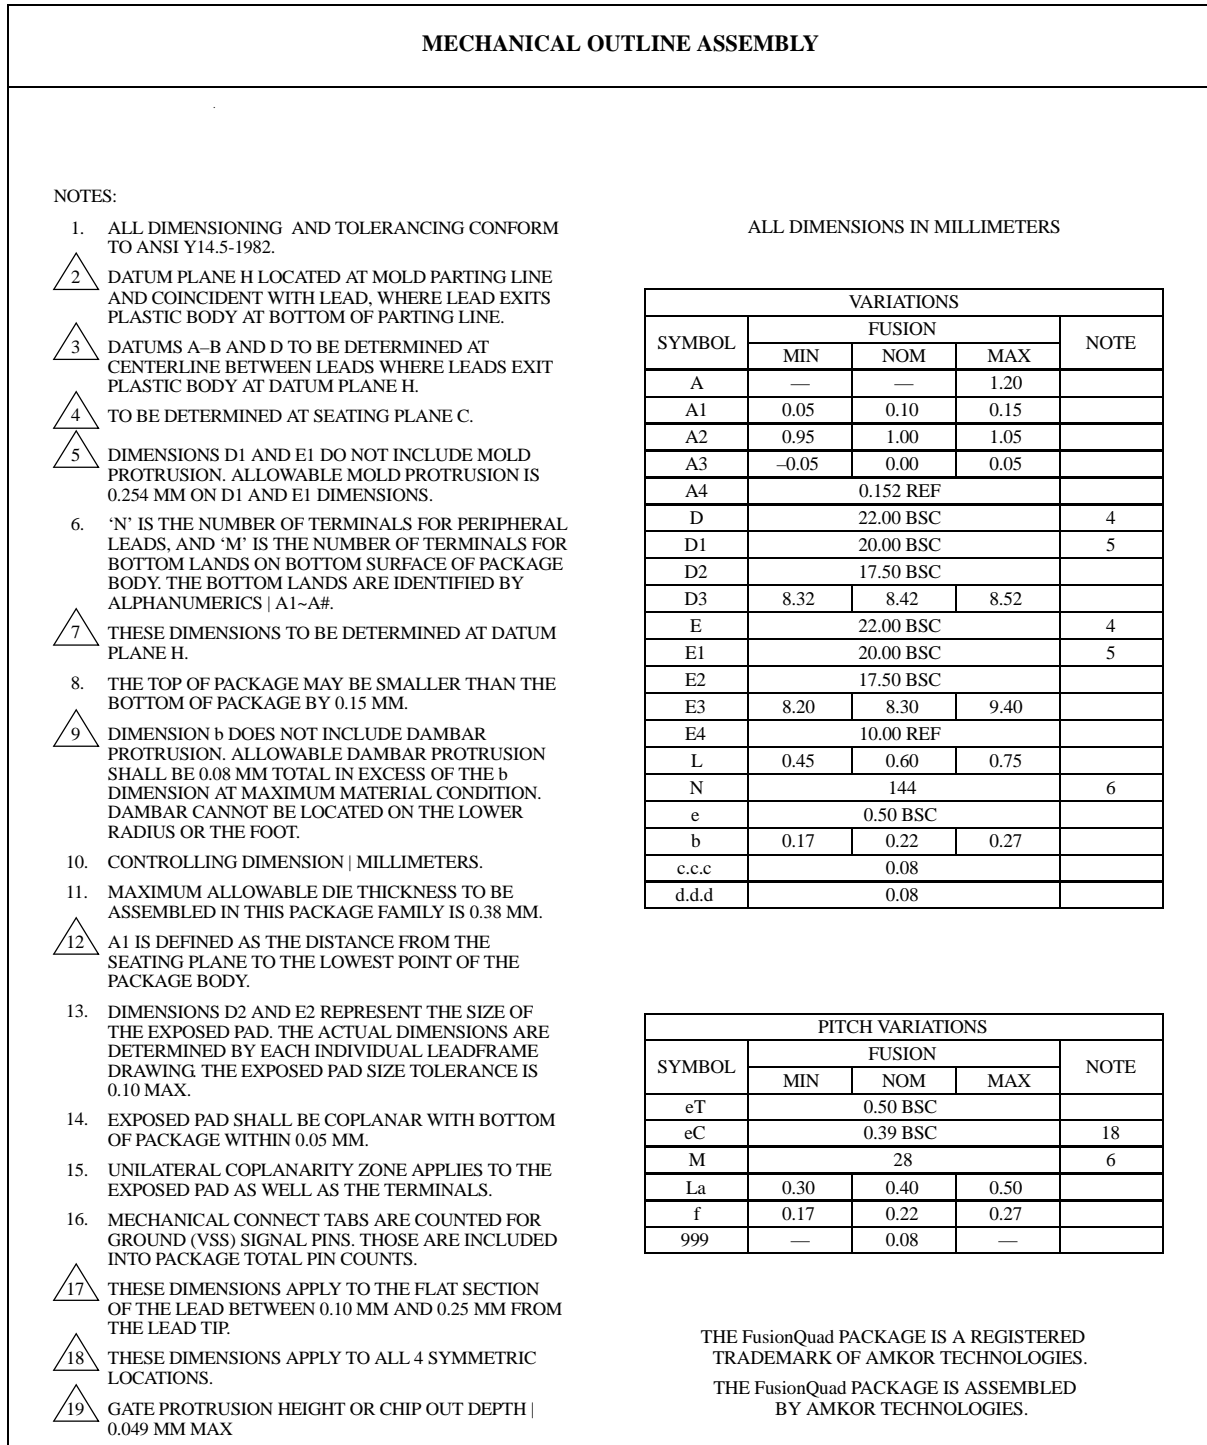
FusionQuad® QFP172 package mechanical drawing (1 of 2)
